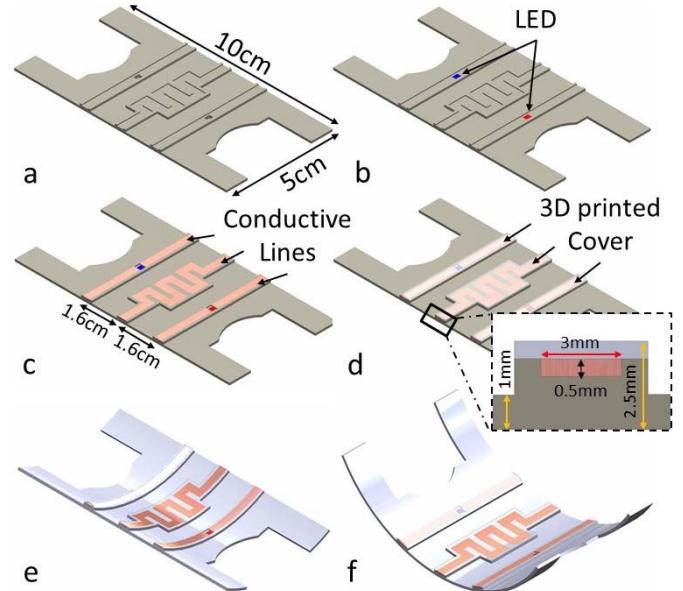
CAD design of the printed structure. (a) The bottom layer with empty cavities. (b) Placement of the coloured LEDs. (c) Silver-palladium paste printed. (d) Structure with the top plastic layer printed embedding the sensor and electronics. (e) Y-axis bending. (f) X-axis bending
